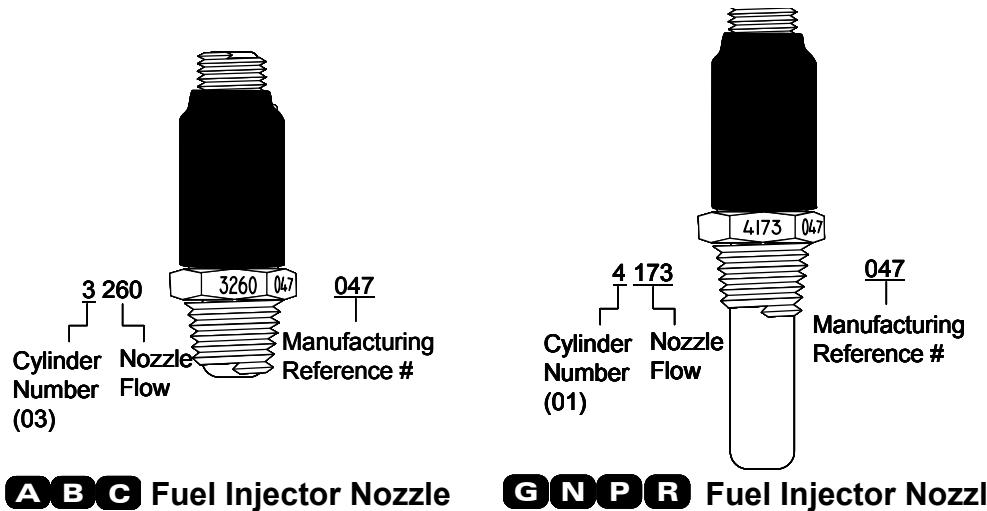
Post-2005 Position Tuned Fuel Injector Nozzle
